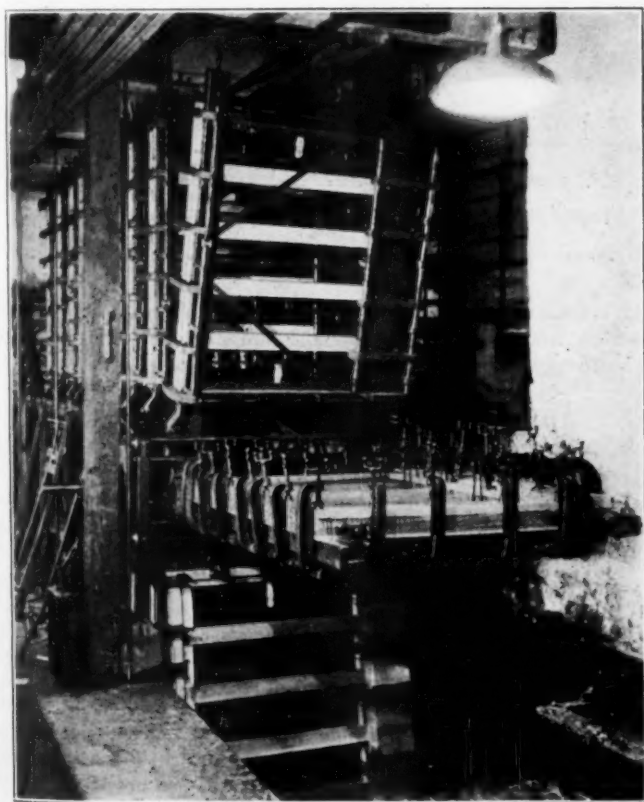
CATERPILLAR CHAIN-TYPE CLAMP CARRIER USED IN GLUING PIANO BACKS
